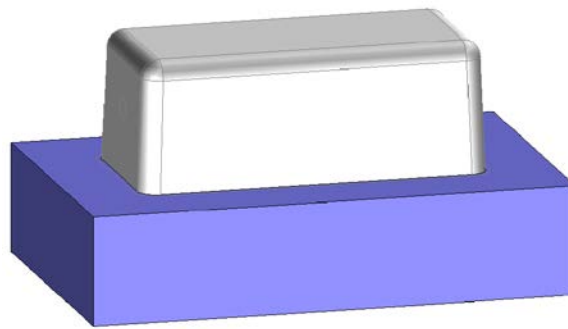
MALE INSERT GEOMETRY DESIGNED TO BE PRODUCED BY AM
